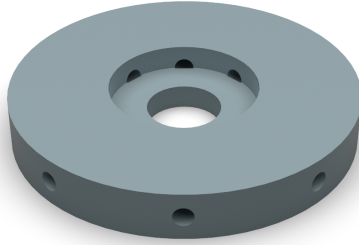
CAD model of aluminum ring heater used in bottom-view construction with visible holes representing cartridge heater locations.
